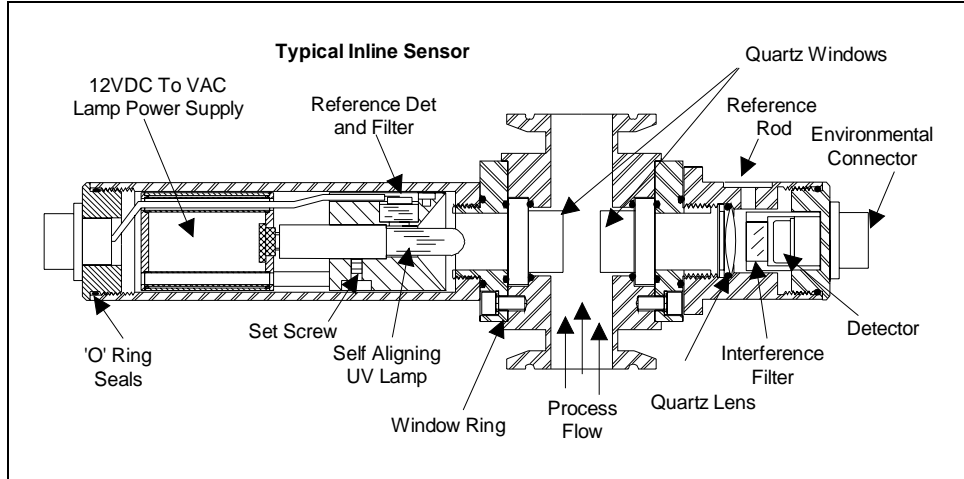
Cross-Sectional View of a Typical AF44 UV Sensor
